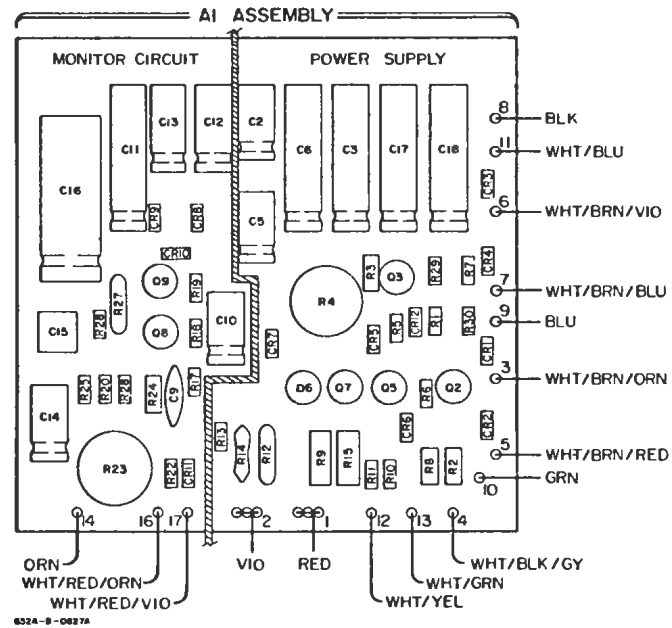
A1 Component Locator, -hp- Part No. 00652-66502.
